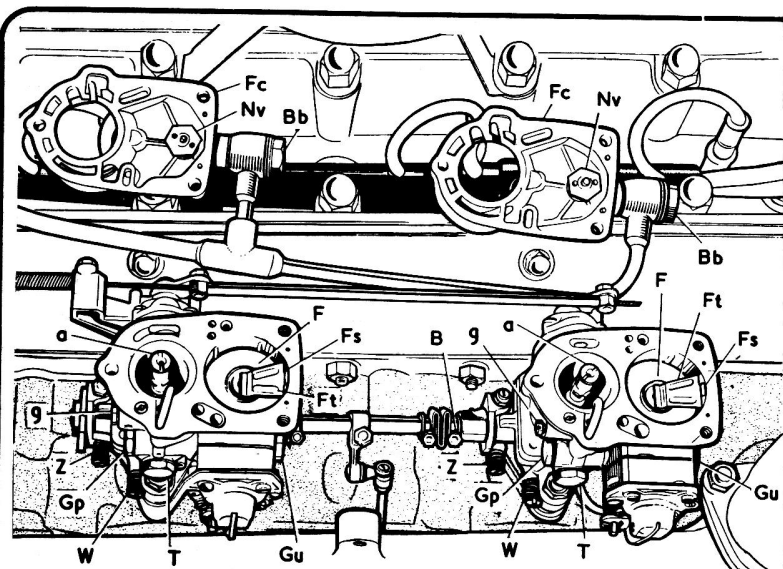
VIEW OF CARBURETTORS INSTALLED WITH FLOAT CHAMBER COVERS REMOVED
